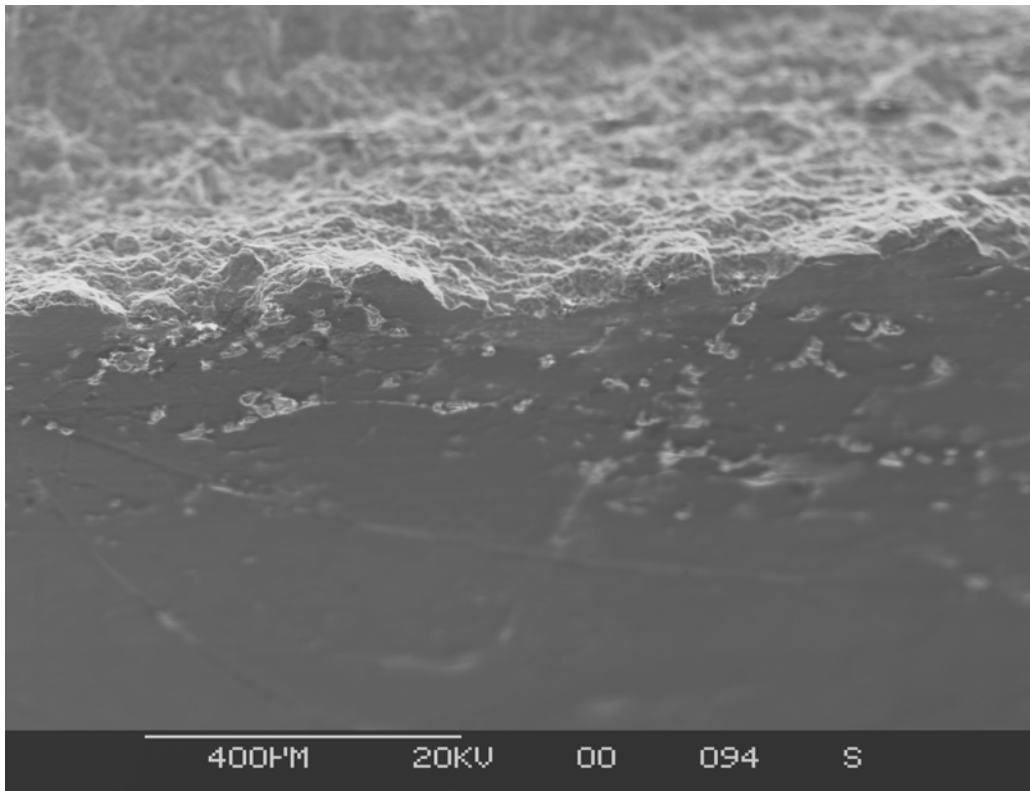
Surface View of Crack Origins on Specimen 5832.
